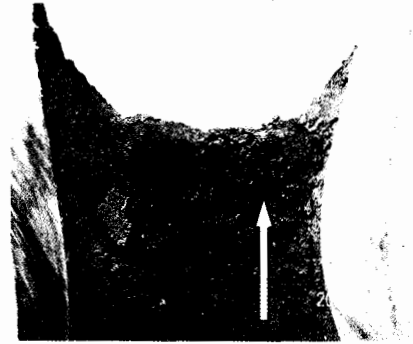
Macrograph of inner surface of elbow in the place without erosion corrosion
